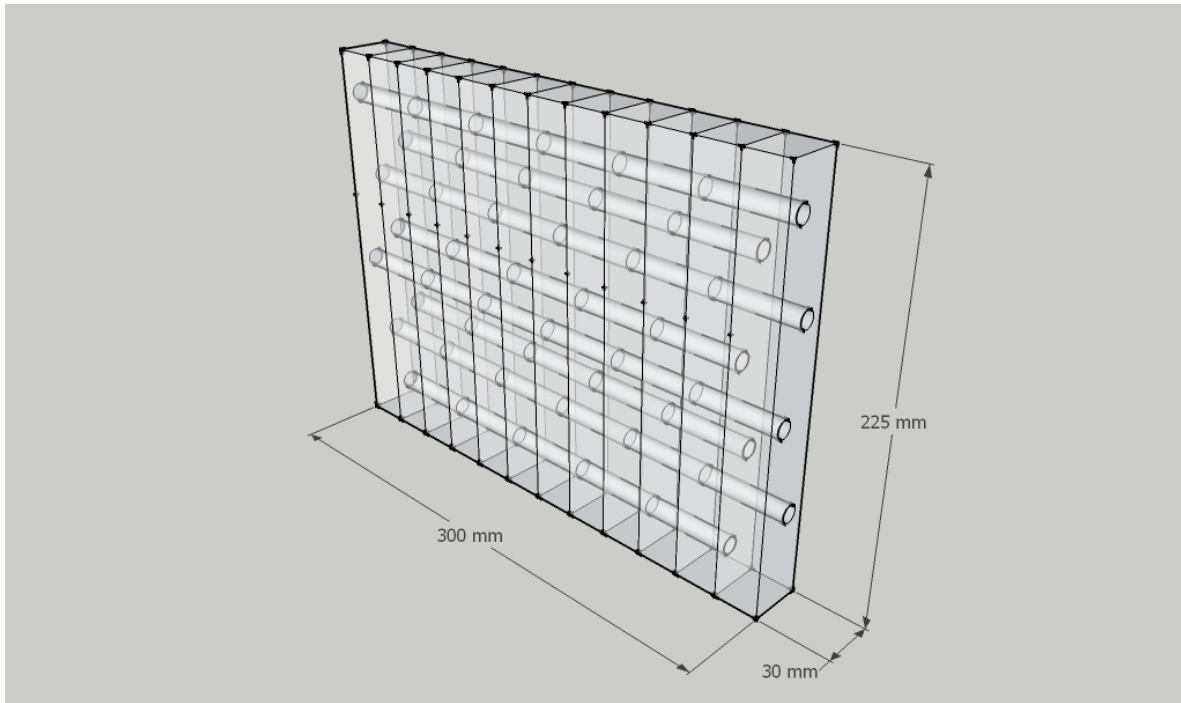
Schematic view of a wood-welded panel.
